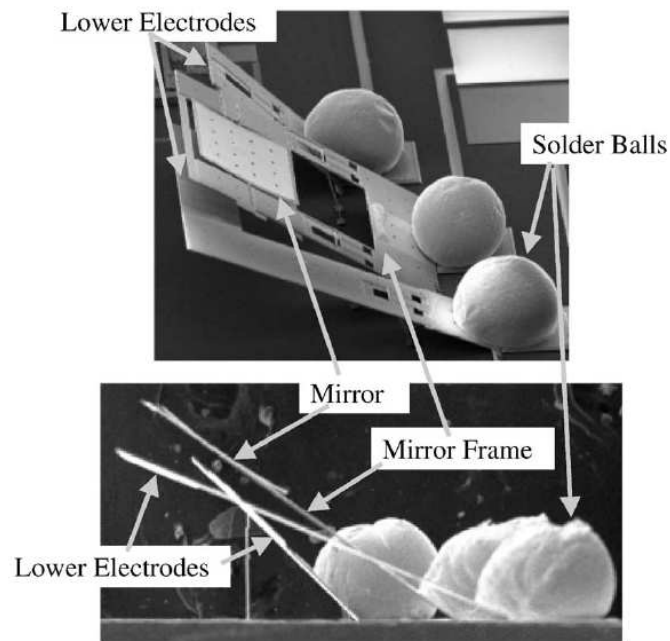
SEM images of mirrors assembled using surface tension of molten solder balls to position the mirror and once solidified, hold the mirror in position [17]
